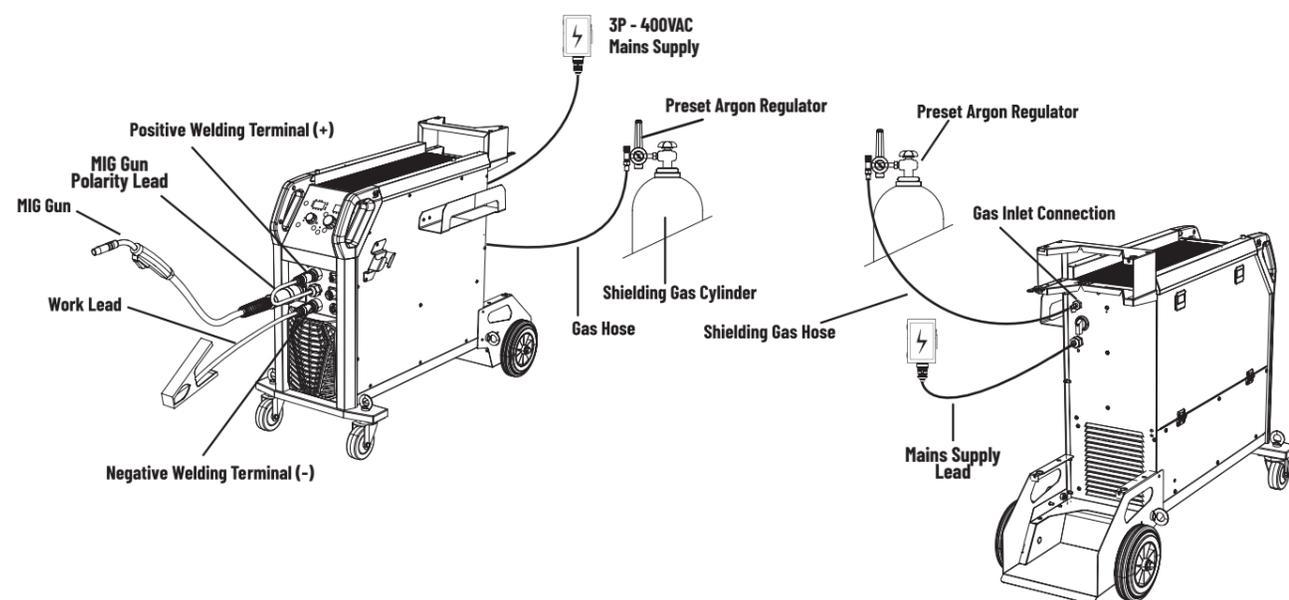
Setup for MIG Welding with Gas Shielded MIG Wire
